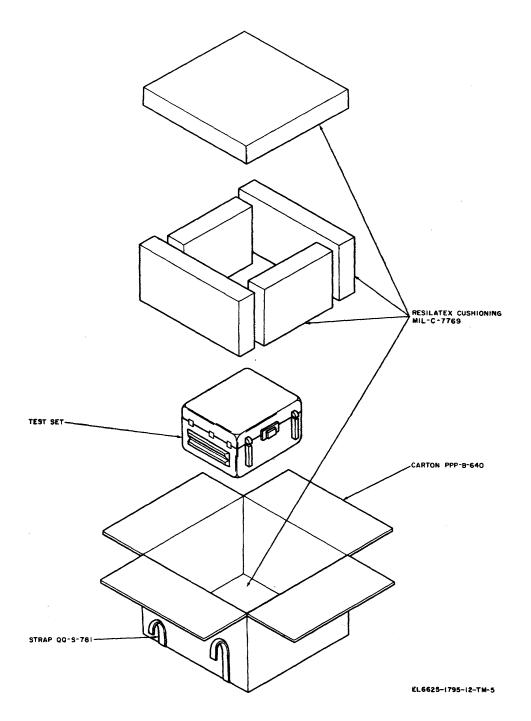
Packaging of Test Set, Radar Altimeter Module AN/APM-322.
